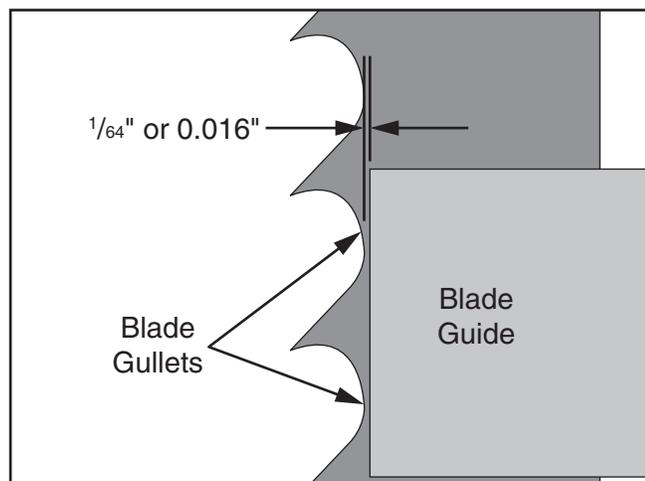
Blade guide positioned 0.016" behind blade gullets.
